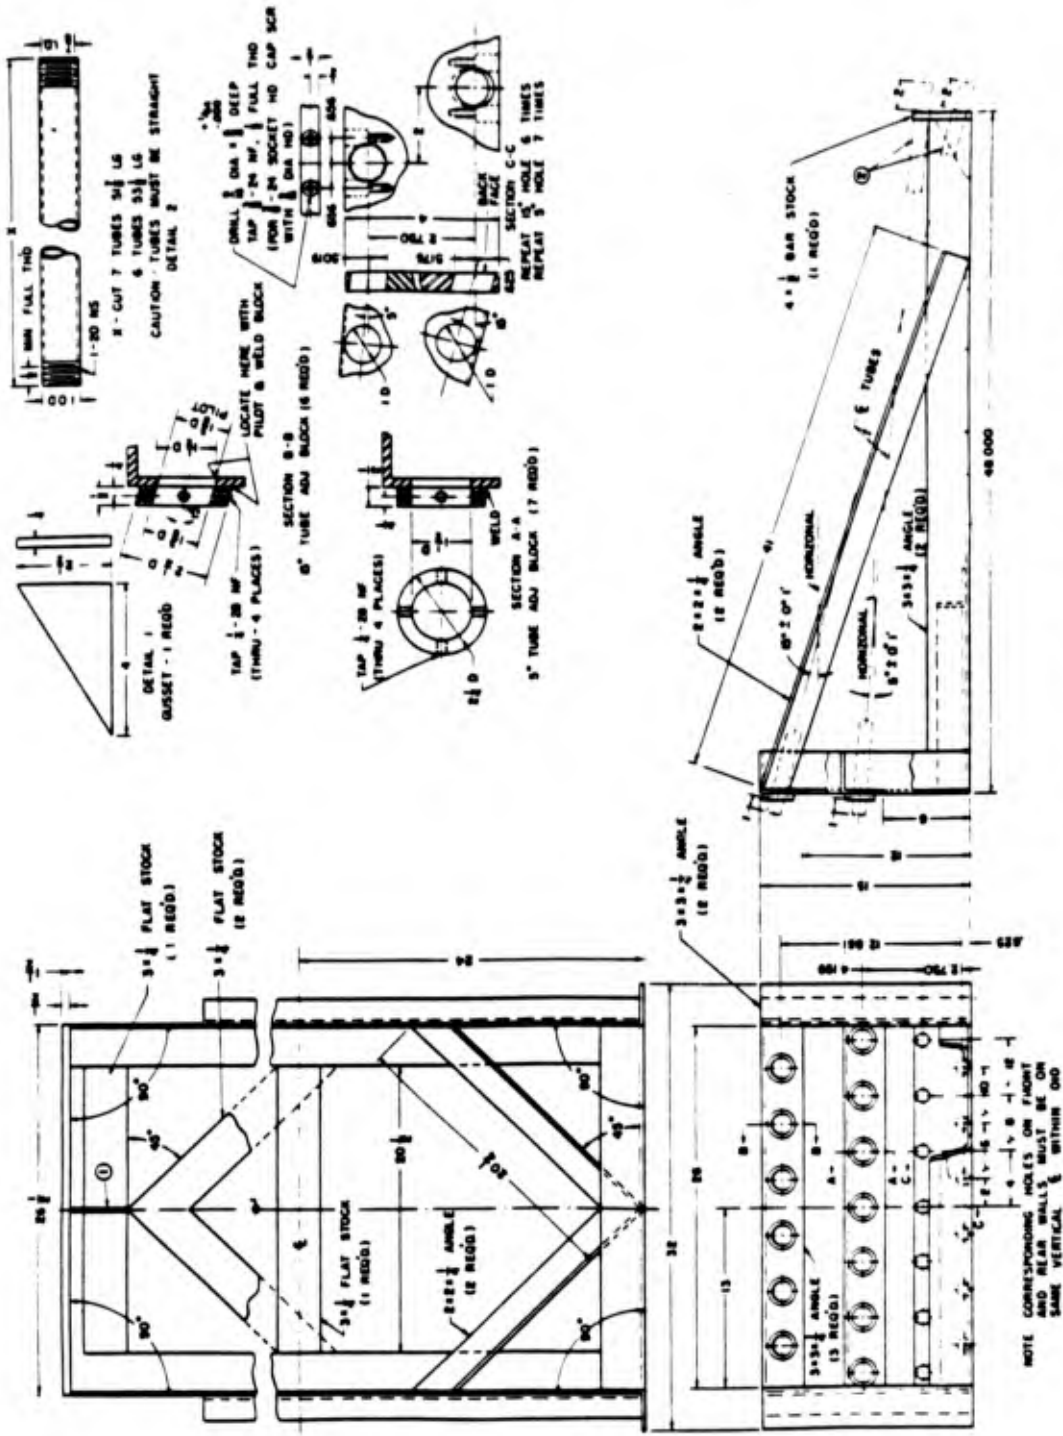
Design Details for a Collimator for Type A Gamma Buildings
